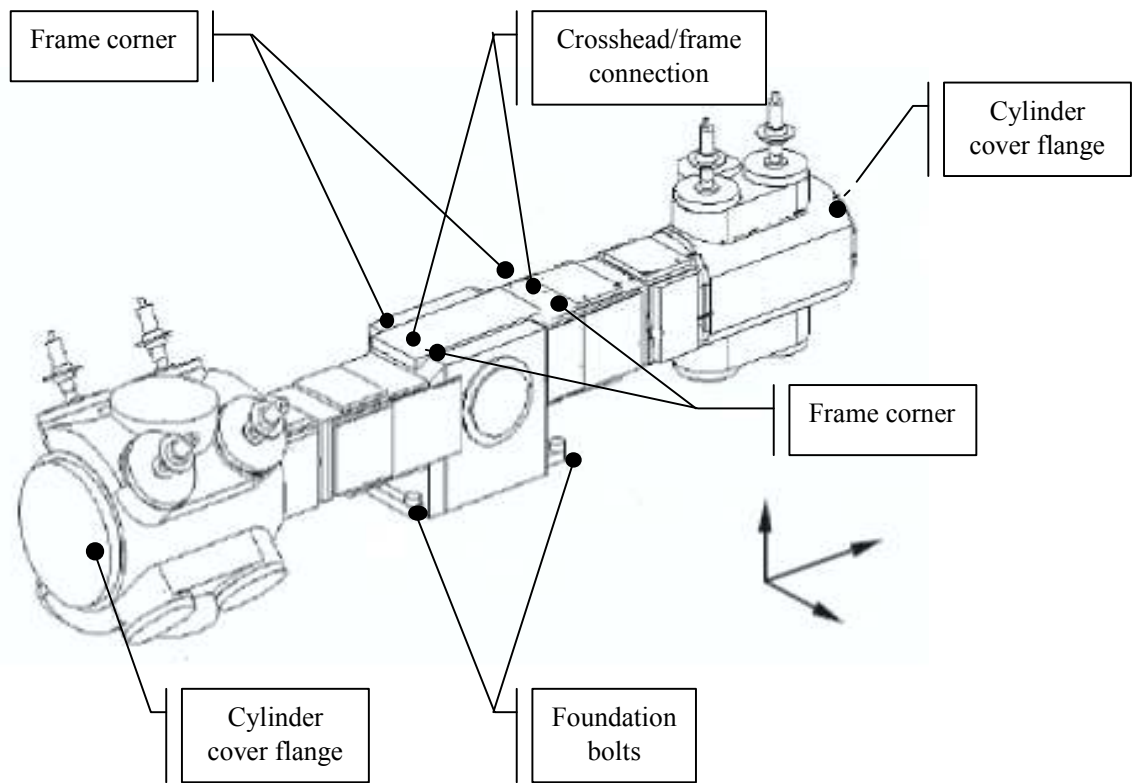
Measuring locations on the compressor for horizontal compressors
